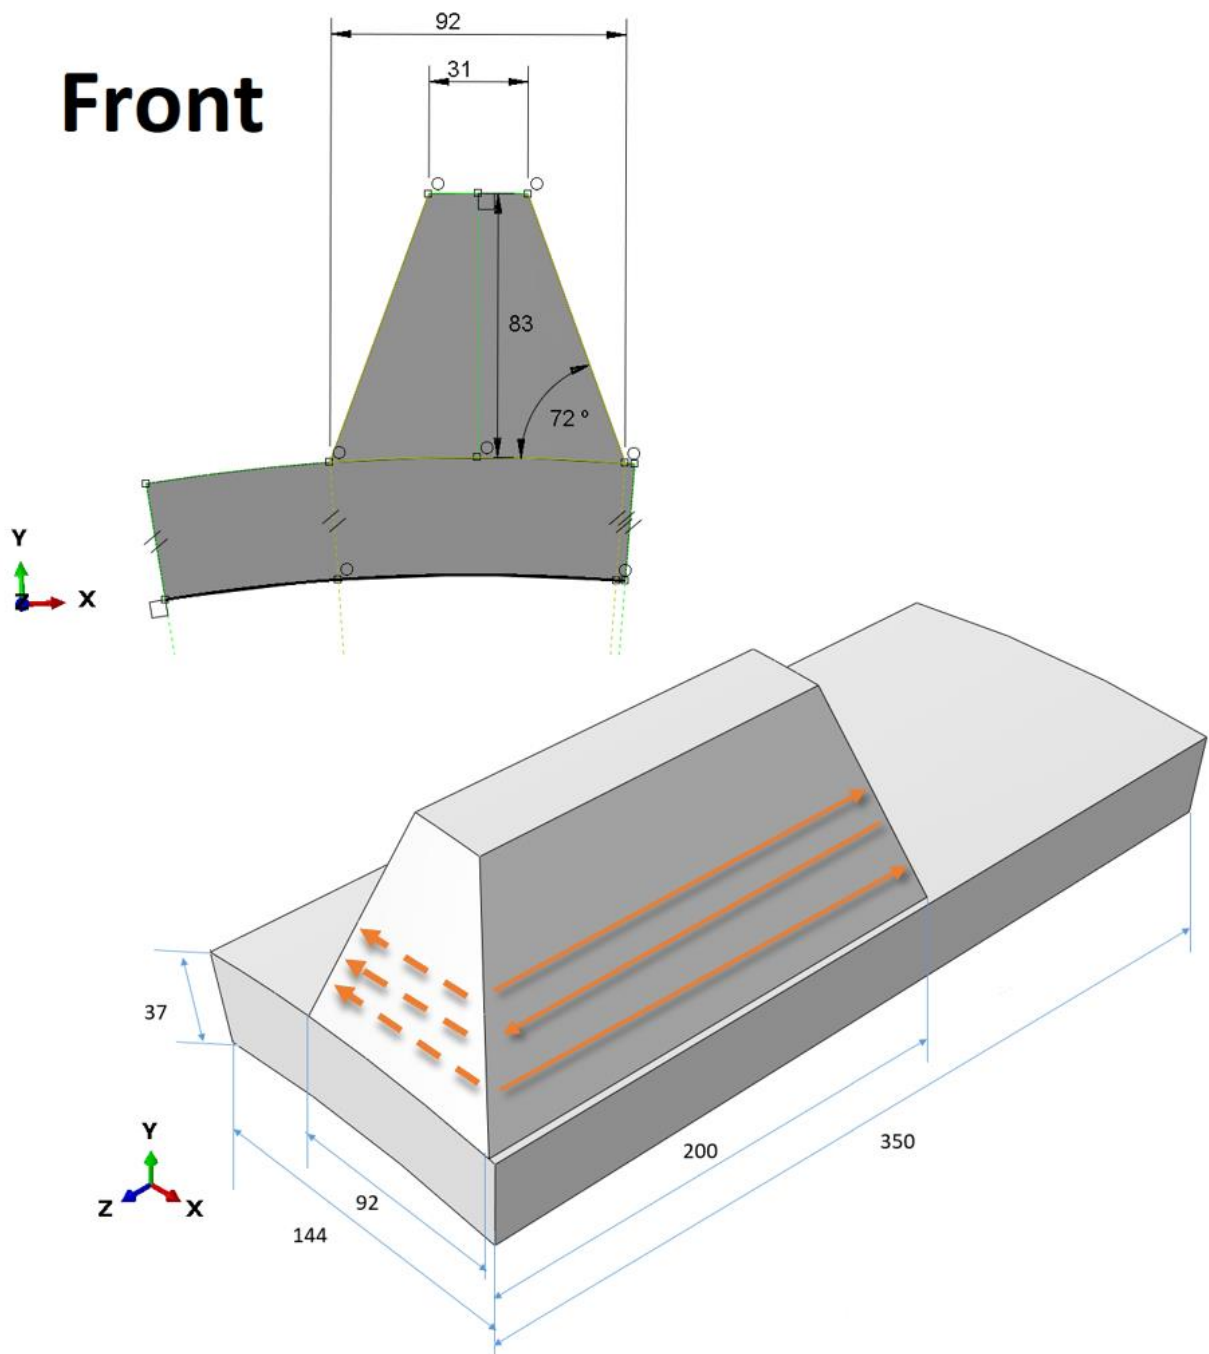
Block A, built on a section of pipe. All dimensions in millimetres. The base of the printed block is 200 mm long and 92 mm wide. The height of the block is 83mm with a 72° slope. The solid orange arrows indicate welding direction, which alternates every layer. The dashed orange lines indicate the direction the beads that are subsequently deposited, which is the same direction every layer.
